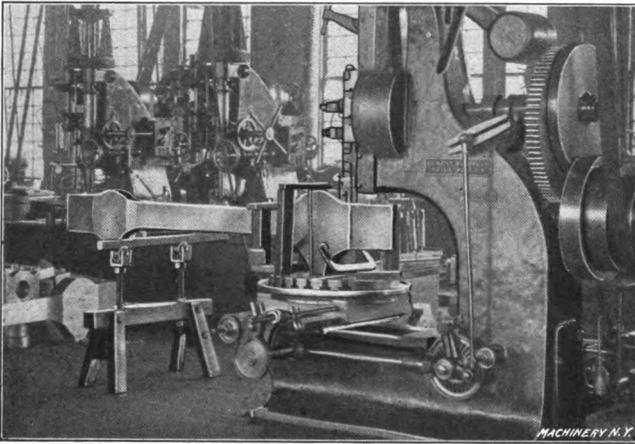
Finishing the Sides of the Tongue for the Knuckle-joint on the Intermediate Rod in the Slotting Machine
